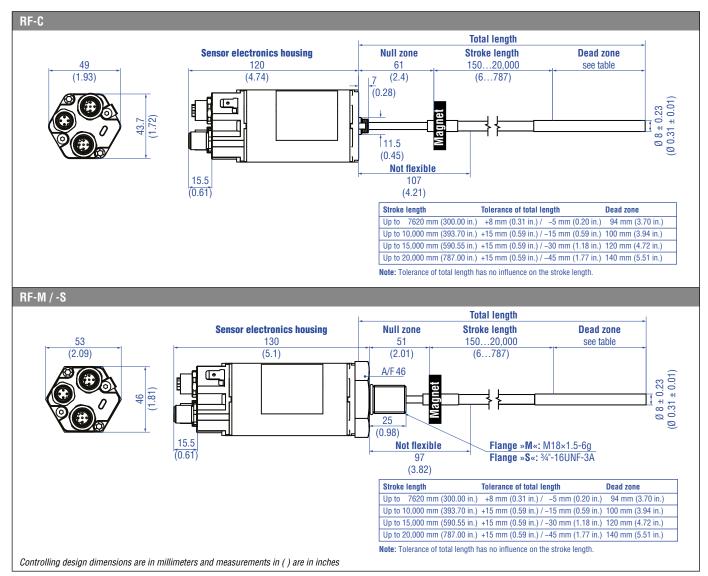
Temposonics® RF base unit with ring magnet (top) and RF with threaded flange with ring magnet (bottom)
